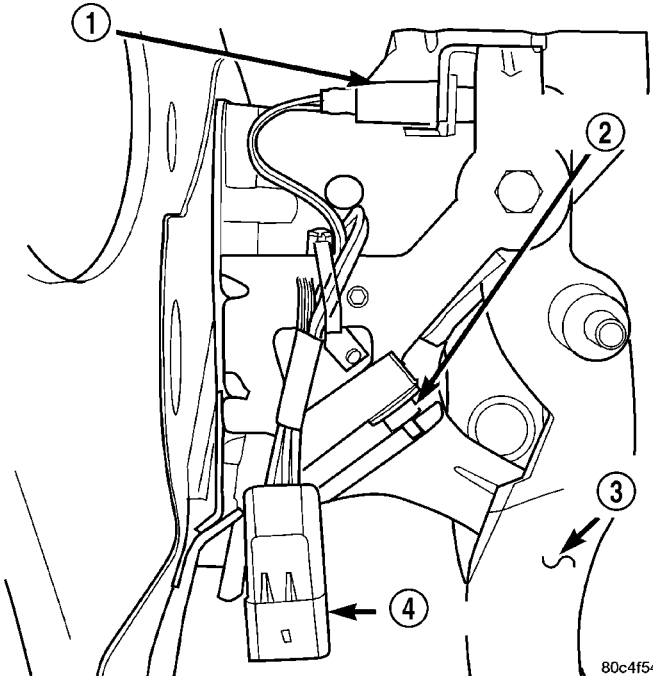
Clutch/Brake Pedal Bracket Assembly
